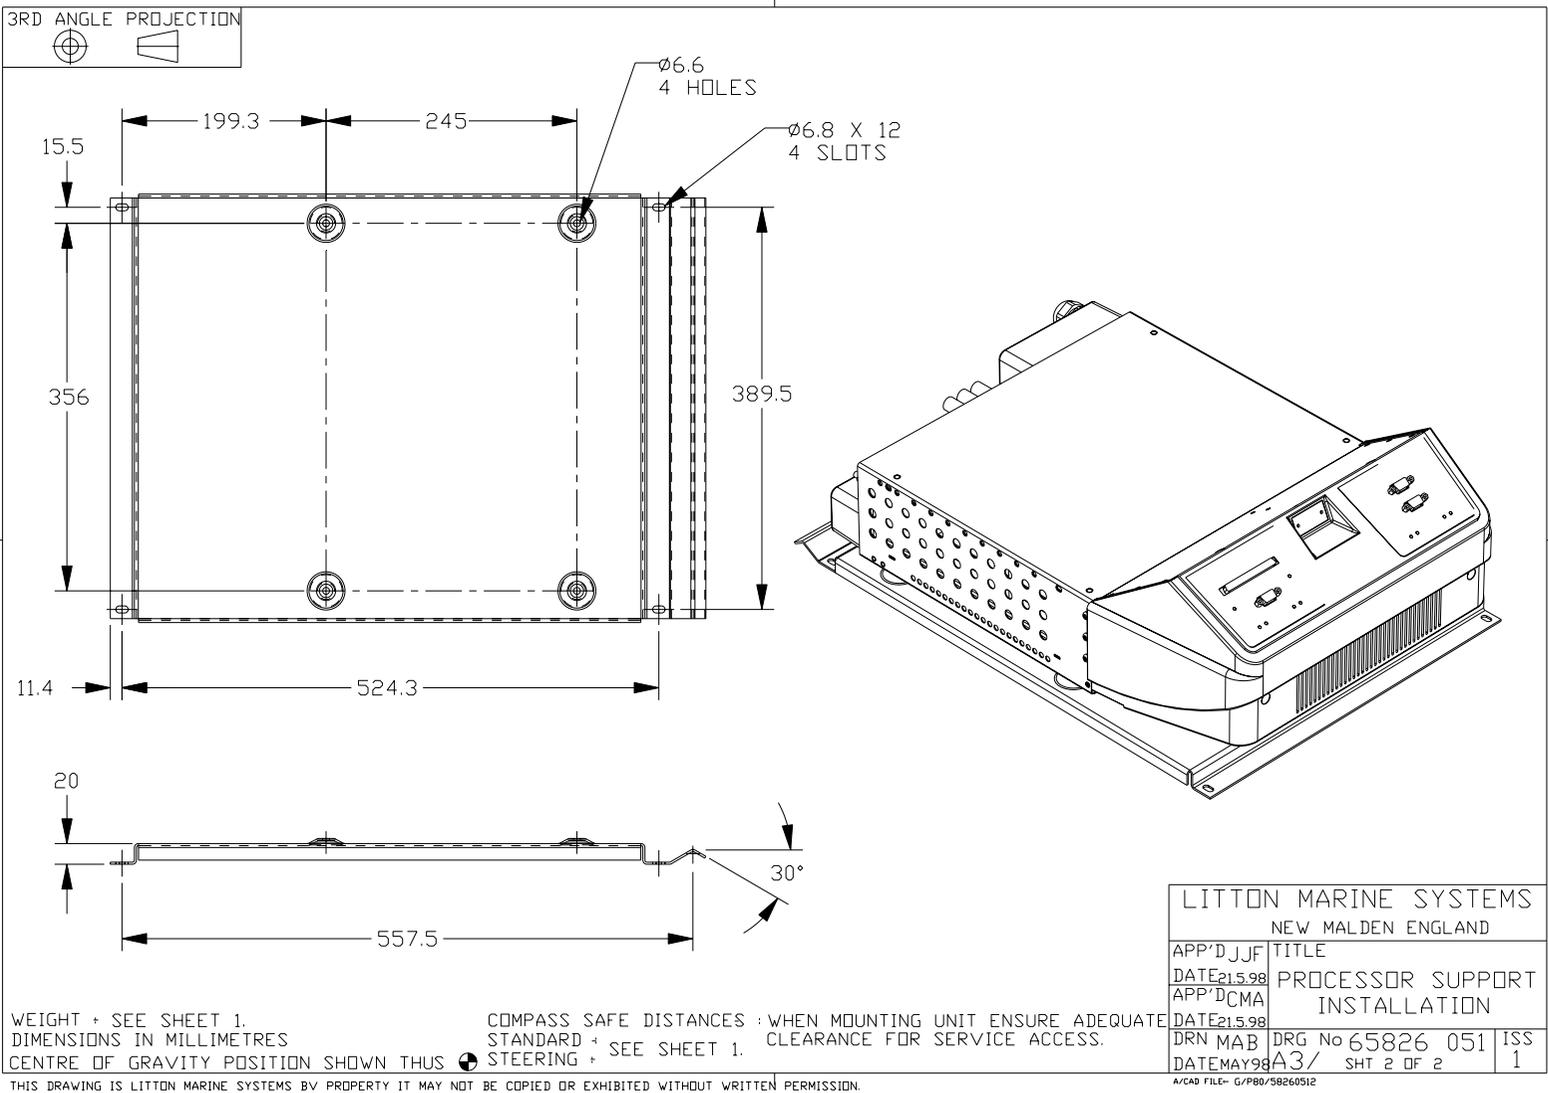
Processor Unit Installation (Sheet 2 of 2)
